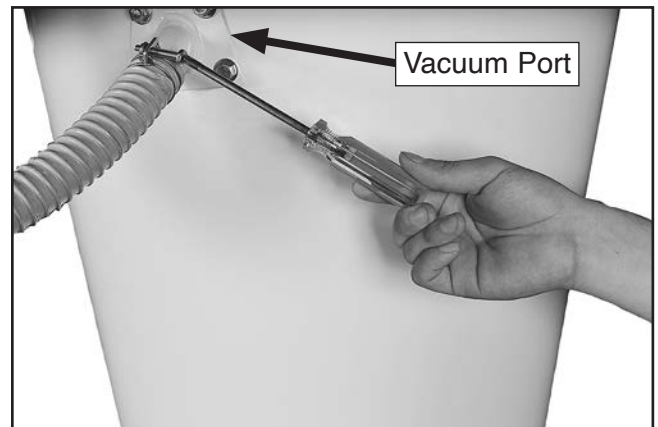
Attaching cyclone vacuum tube and hose attachment.
